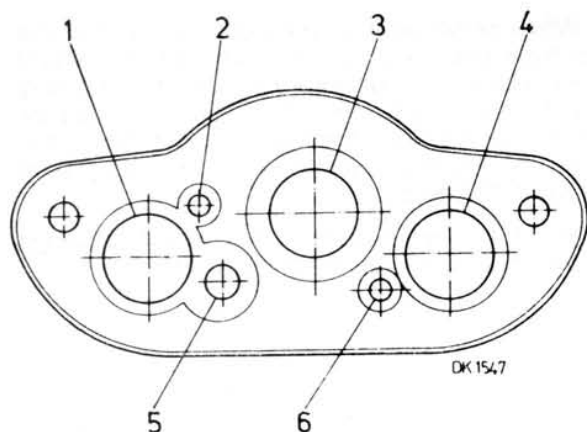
/1 - Arrangement of Passages through Floor Tunnel Cover (when viewed from rear)
